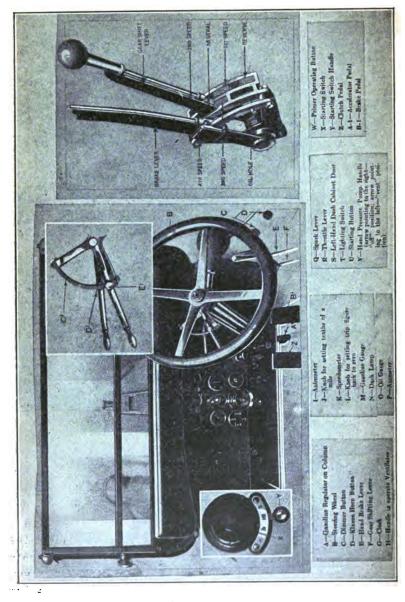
Dash Assembly, Engine Speed Control and Gear Shift Lever of Pierce Arrow Cars.
